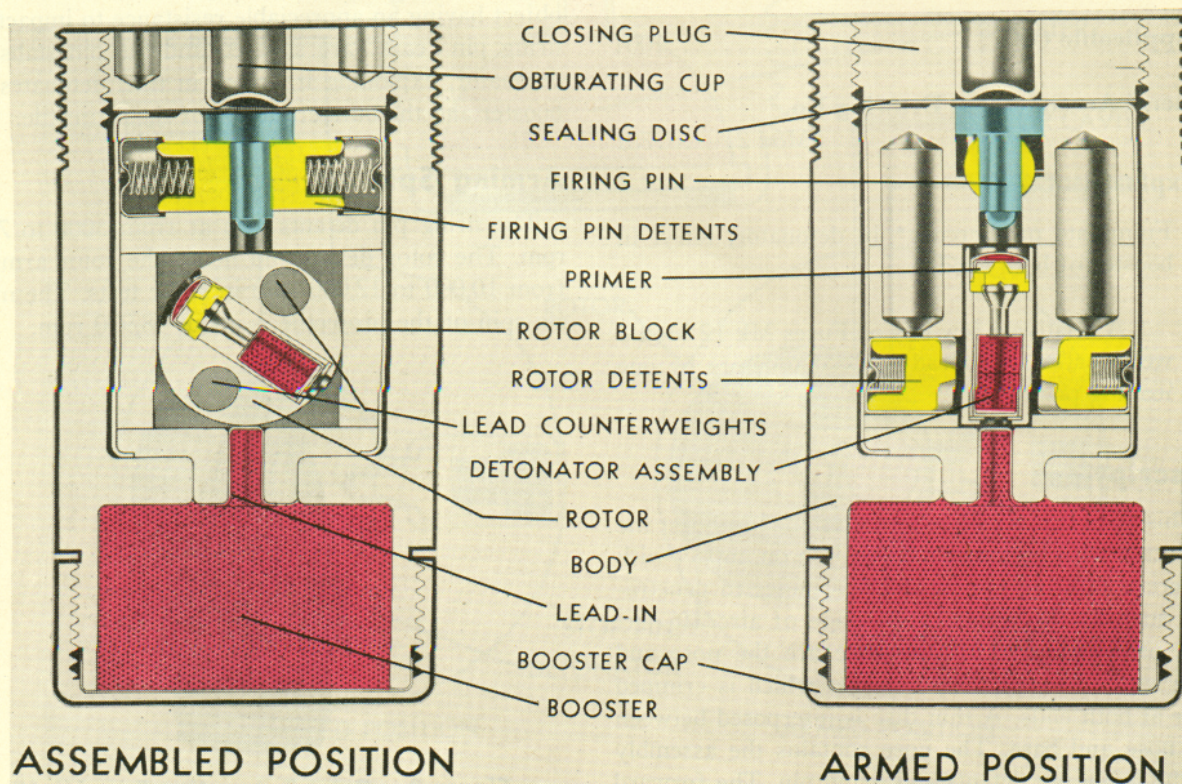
Auxiliary Detonating Fuze Mk 17 Mod 0-7—Sectional View
